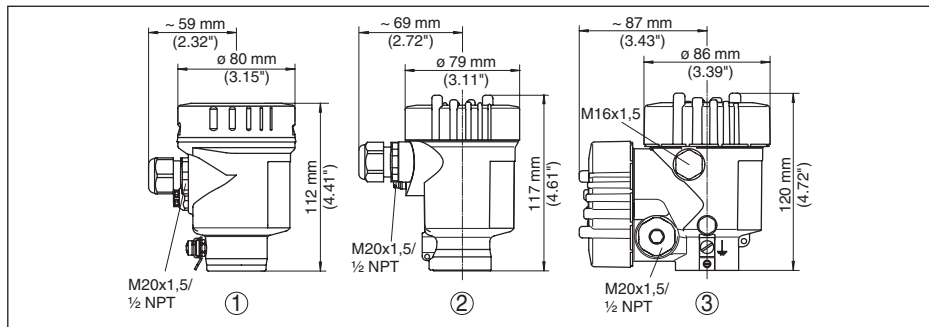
Housing versions in protection IP 66/IP 68 (0.2 bar) - with integrated display and adjustment module the housing is 9 mm/0.35 in higher
